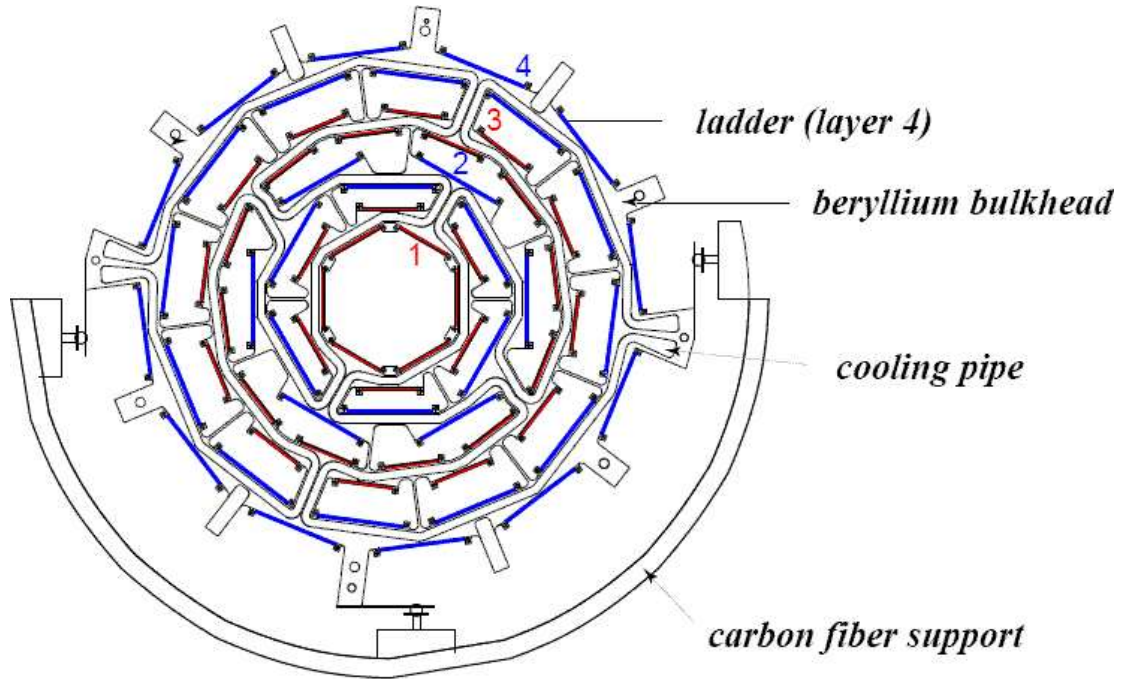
Cross-section of a typical SMT barrel assembly.
